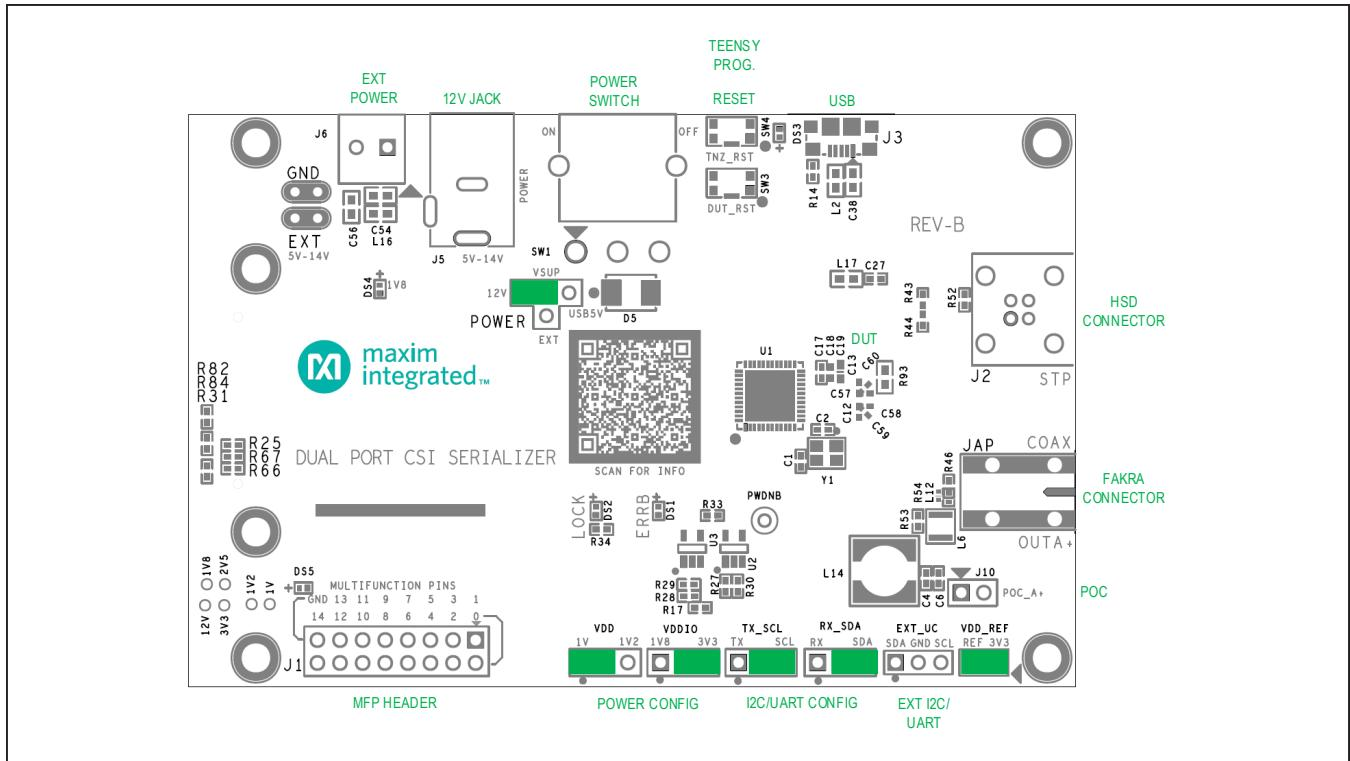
MAX9295D Coax/HSD EV Kit Key Components and Jumper Installation on Front of Board
